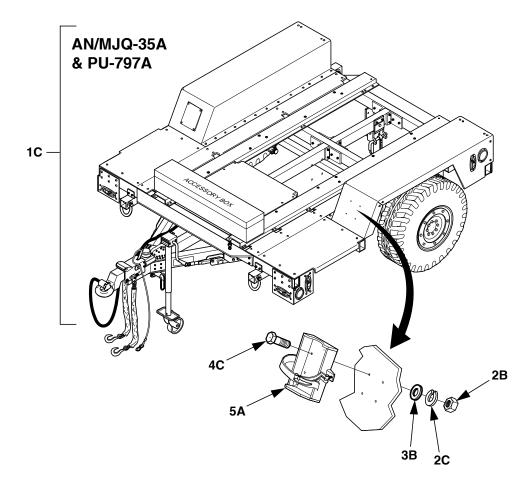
Power Plant/Power Unit Trailer Assembly (Sheet 2 of 2).
